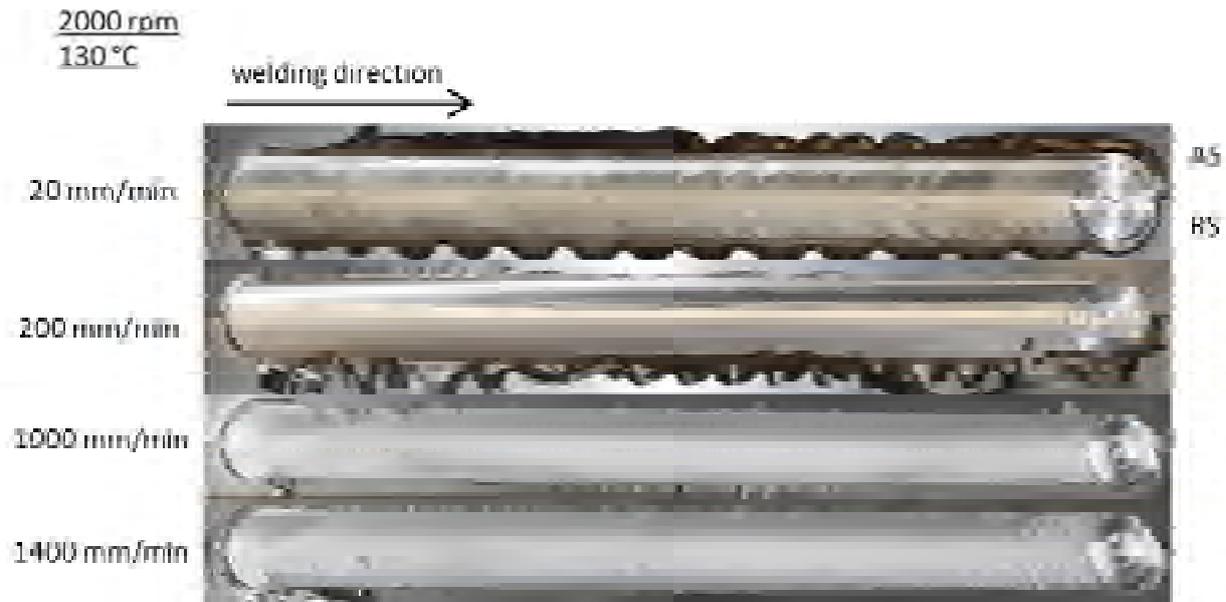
surface appearance of FSW of extruded AZ31 for different welding speeds at constant rotational speed and initial temperature of 130 °C.
